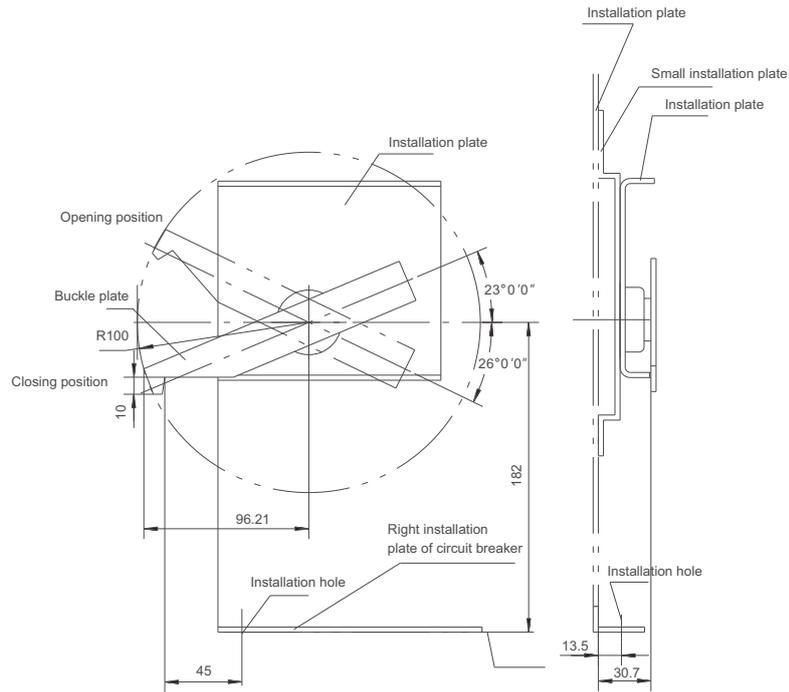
NA8G-2500~4000 fixed type circuit breaker status door interlock installation dimensions
